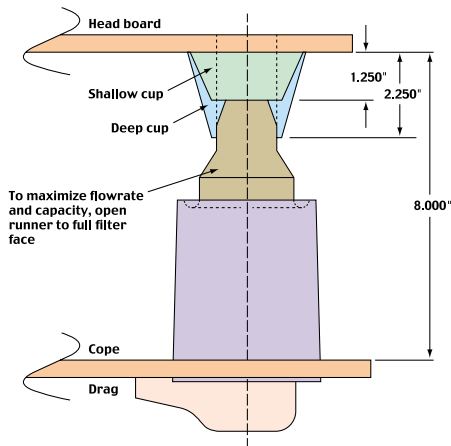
This moulding machine set-up is used in close-over side feeder applications
